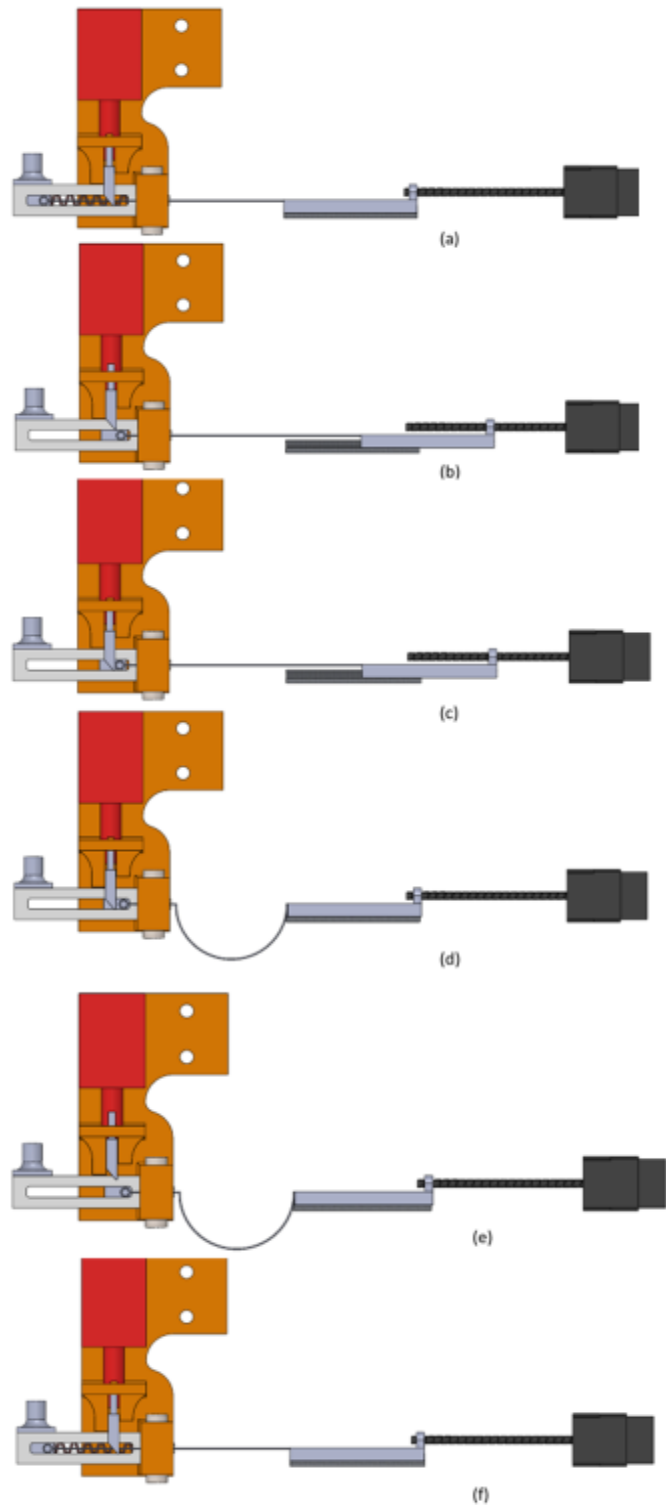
a) Starting position of particle launcher, b) Compressing the spring, c) Holding the compressed spring with solenoid, d) Releasing the thread, e) Releasing the spring by moving the solenoid, and f) Particle holder moves back to the starting position
